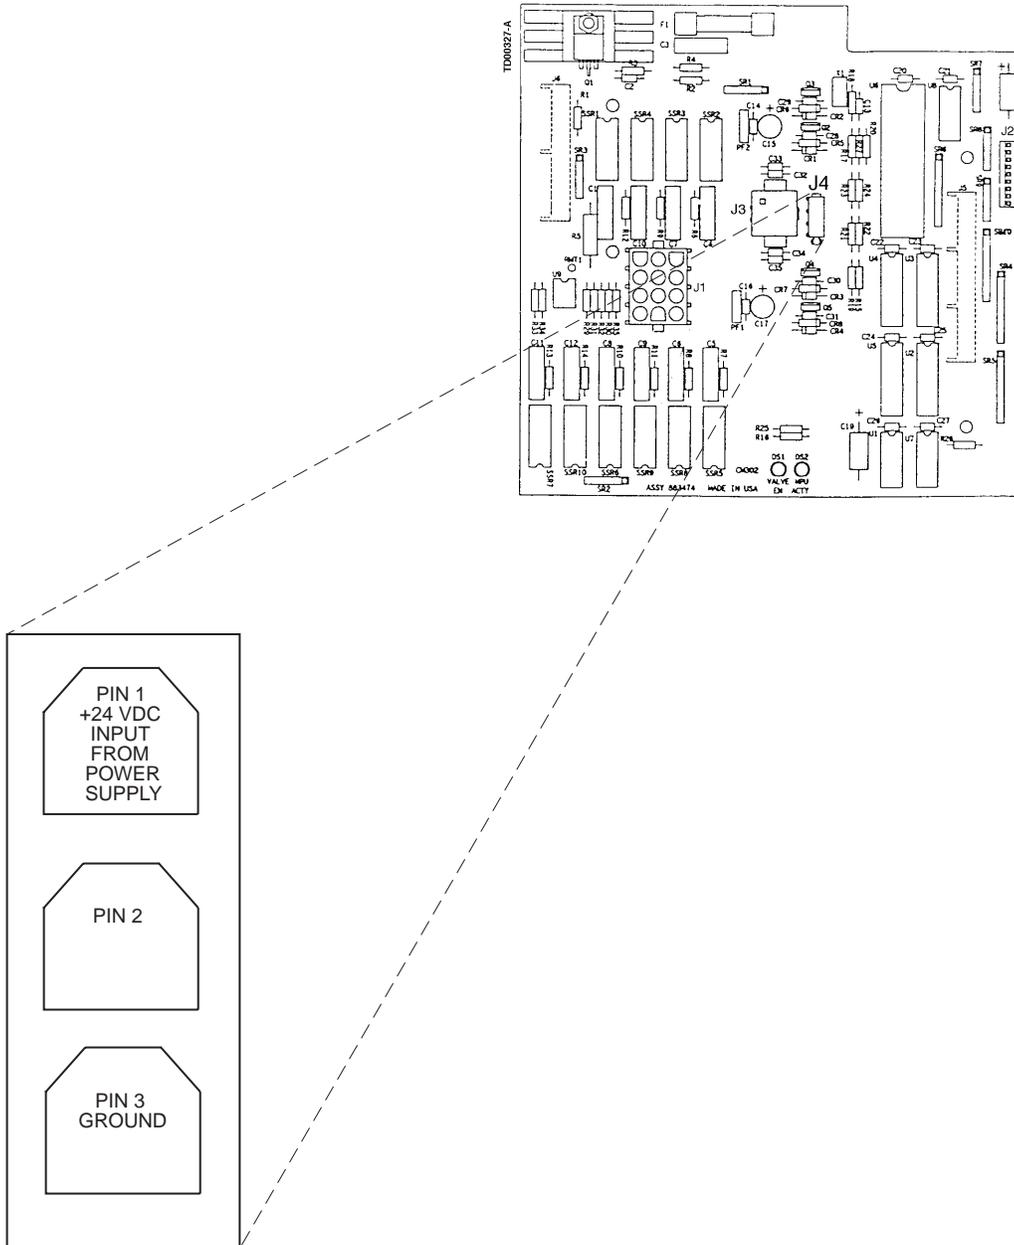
PINOUT CONNECTIONS TO BLENDER SOLENOID DRIVE BOARD - J4.
